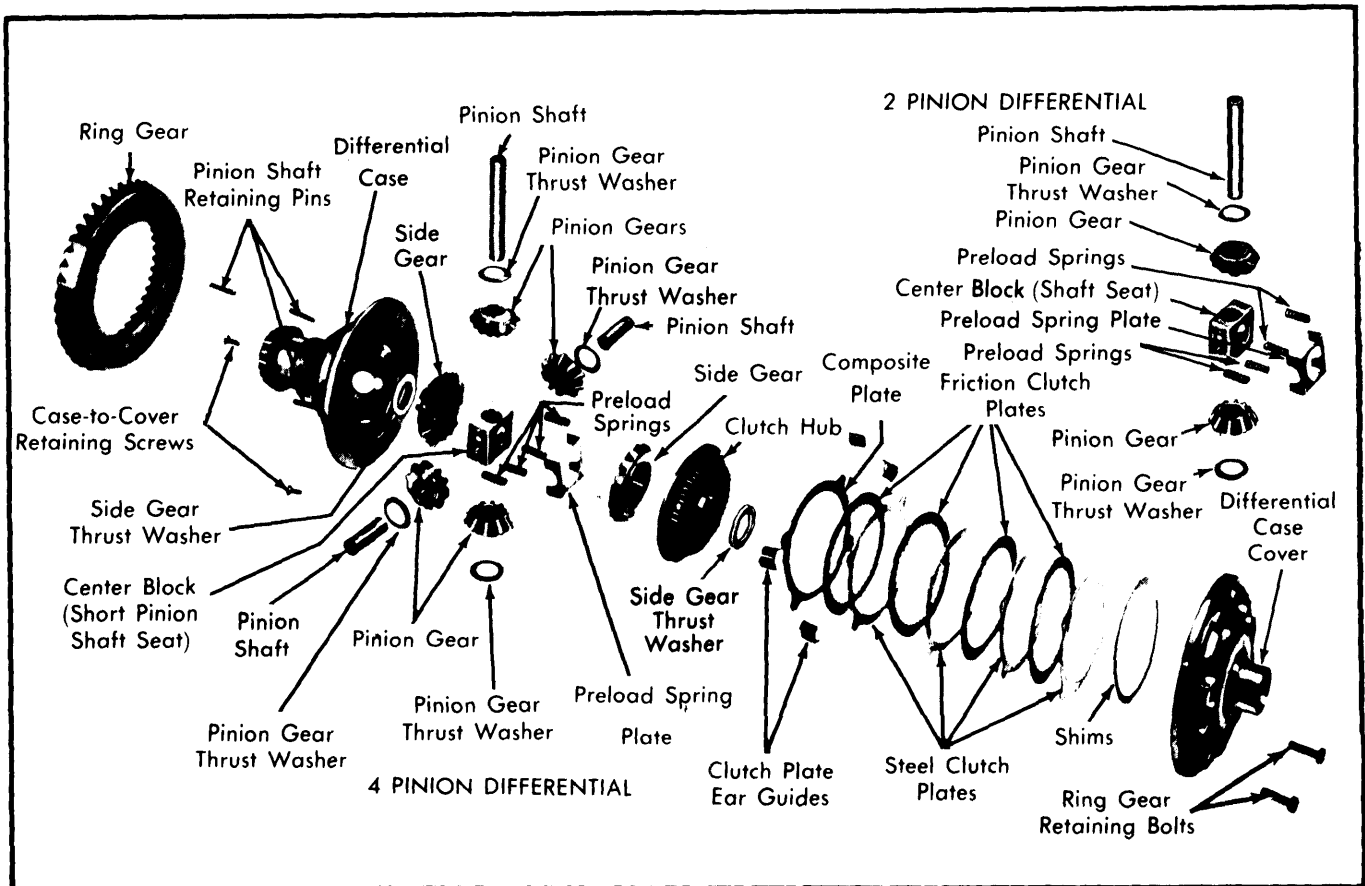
Exploded View of Ford Motor Co. Traction-Lok Differential
